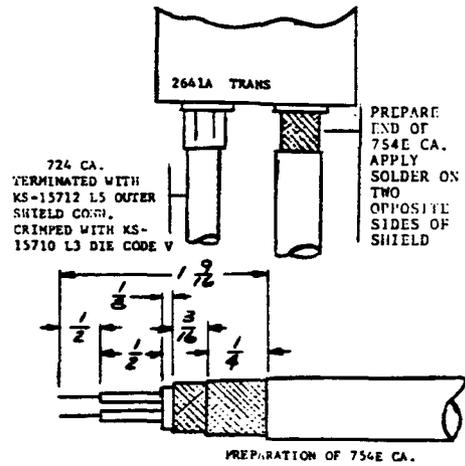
SOLDERLESS CONNECTION TO SHIELDED GROUND LEAD USING INSULATED OUTER. PARA. (5.2216)
